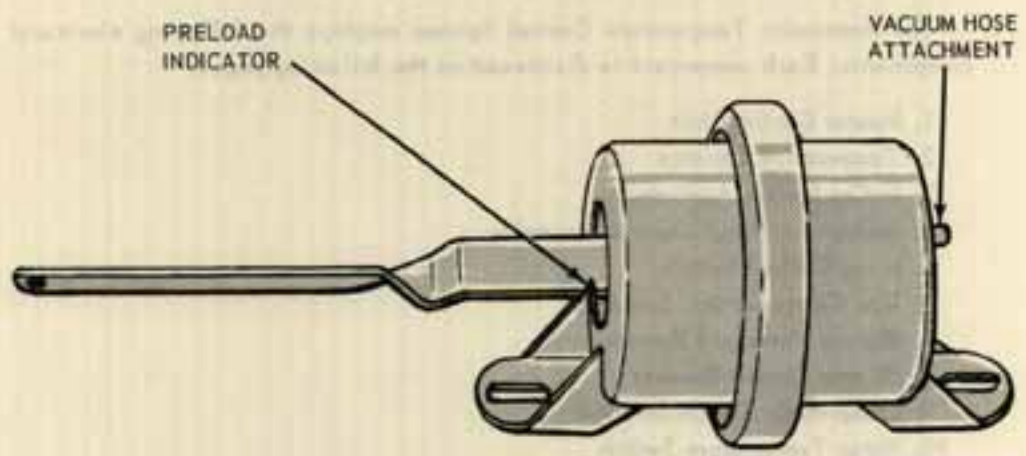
Outside Recirculate Air Door Heat - Defrost Air Door, A/C Heat Air Door Vacuum Motor Adjustment
